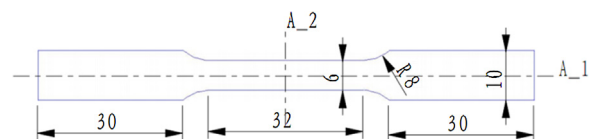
A drawing of the ASTM-E8 sub-size AZ31 sheet specimen for uniaxial tensile tests. All dimensions are in mm.
